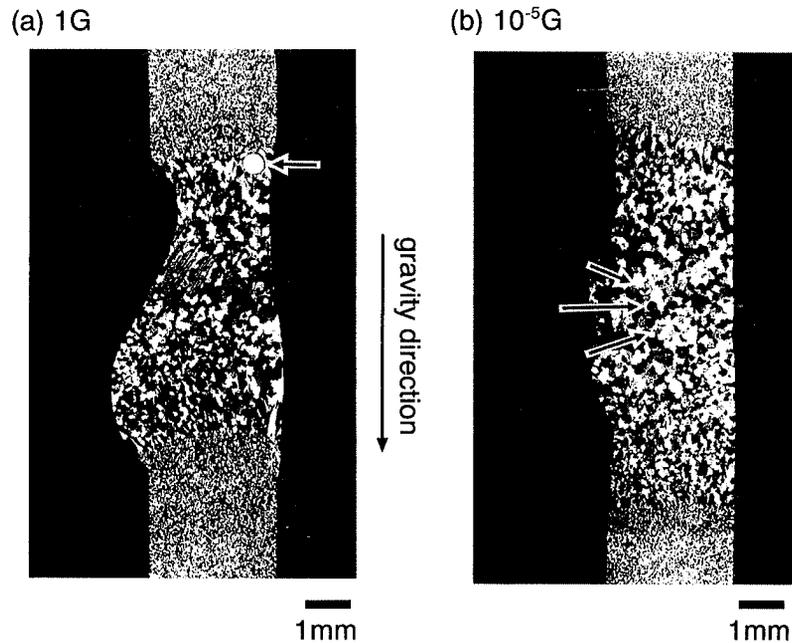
Transverse sections of butt welds in horizontal welding with helium shielding gas. The arrows indicate the pores.
